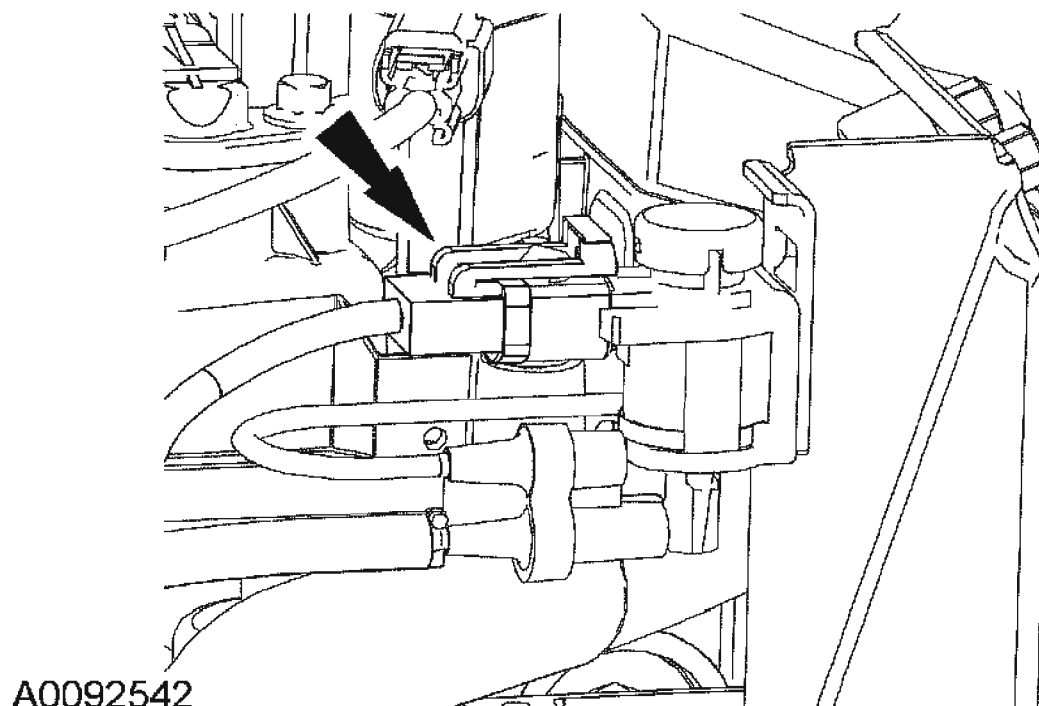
Connecting Secondary Air Injection Vacuum Regulator Electrical Connector
